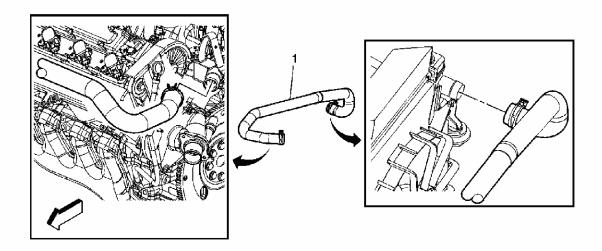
View Of Radiator Inlet Hose (LD8) Courtesy of GENERAL MOTORS CORP.
